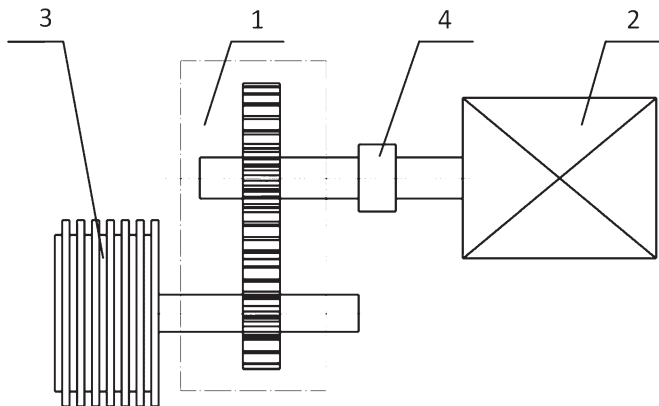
Classic stand for toothed gears testing, 1 – body of the tested toothed gears, 2 – motor, 3 – loading clutch or electromechanical brake, 4 – clutch [3]
